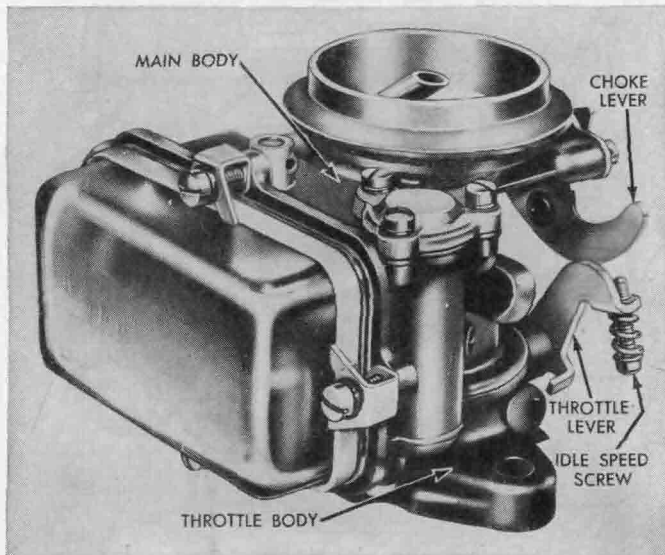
Carburetor used on late-model Ford six-cylinder engines. (Ford Motor Company)
